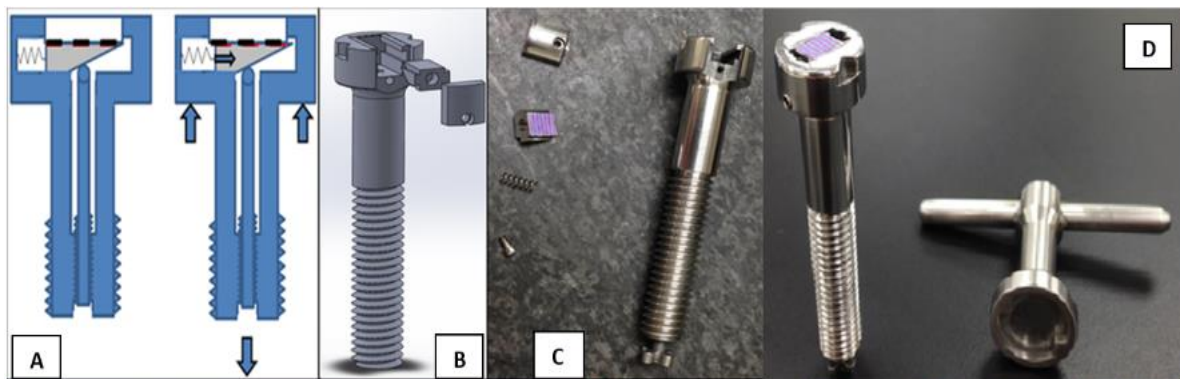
3: Prototype 3 screw (A) Schematic showing working of screw, (B) SolidWorks exploded view, (C) Disassembled view with all the components, (D) Assembled view with custom screw wrench ³⁶
